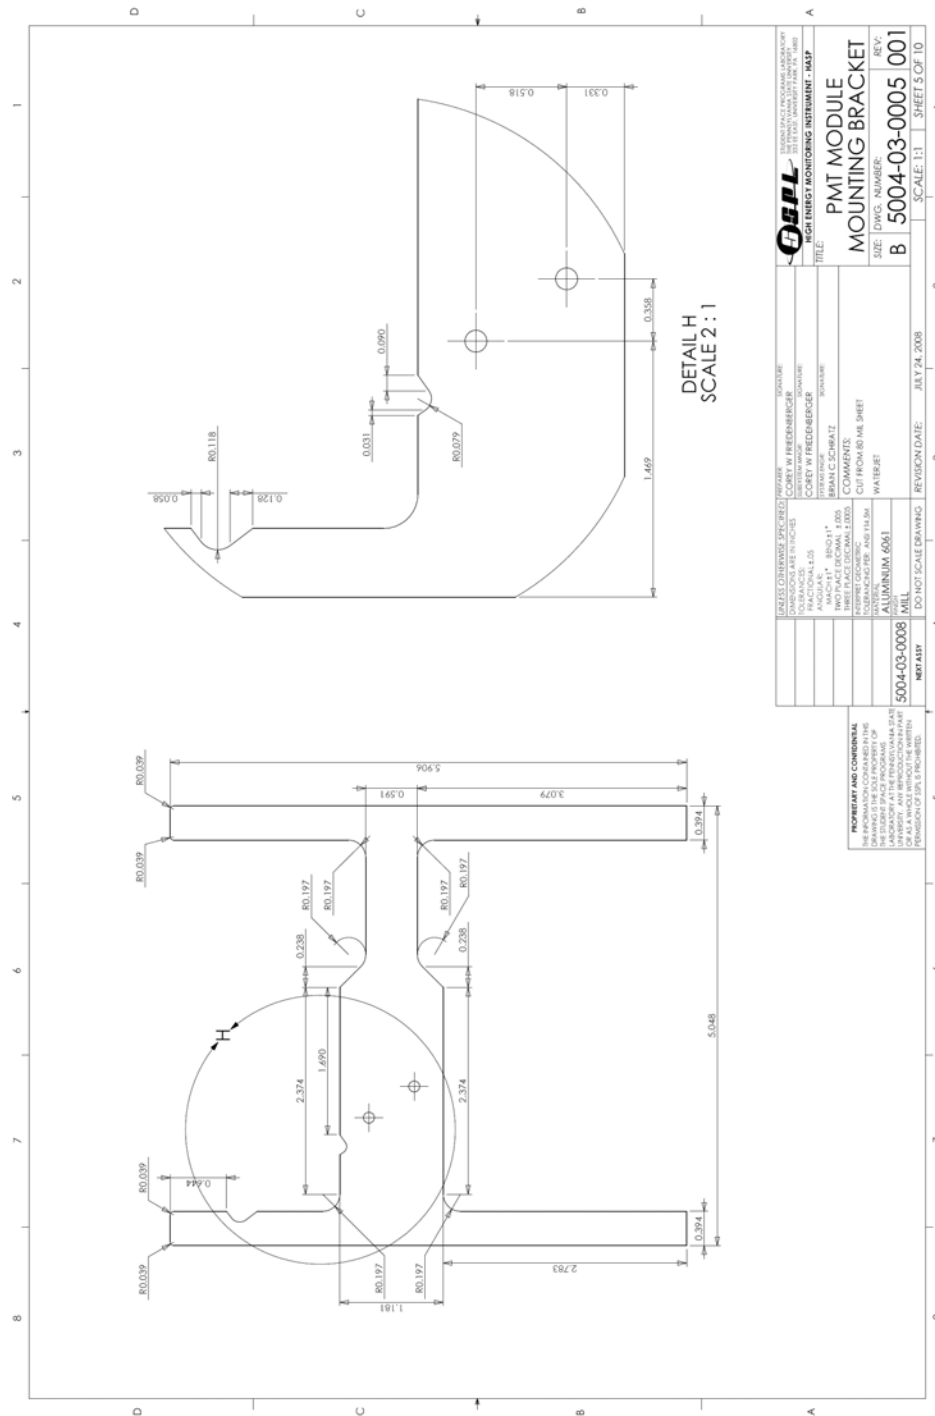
Mechanical Drawing: PMT Module Mounting Bracket
